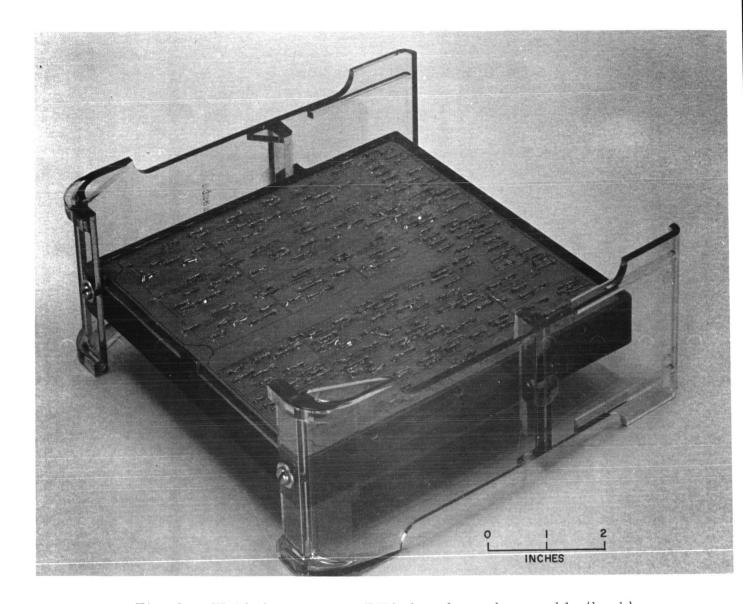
Welded prototype, PHA decoder subassembly (back)
